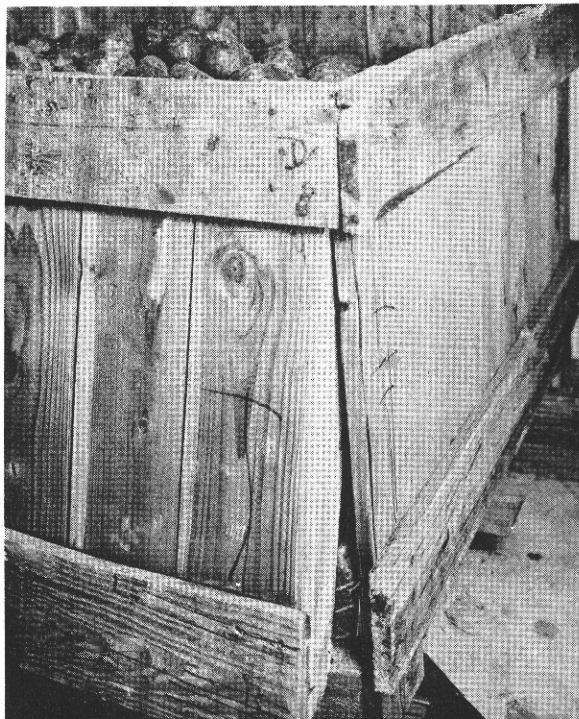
Bin pallet A after the cornerwise-drop test. The three assembly nails at the bottom corner were incorrectly driven so that they did not penetrate the corner post.
